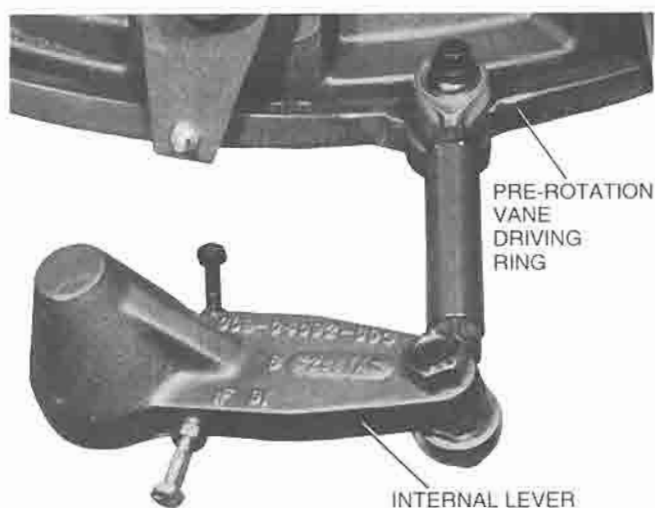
INTERNAL PARTS - PRE-ROTATION VANE ASSEMBLY
